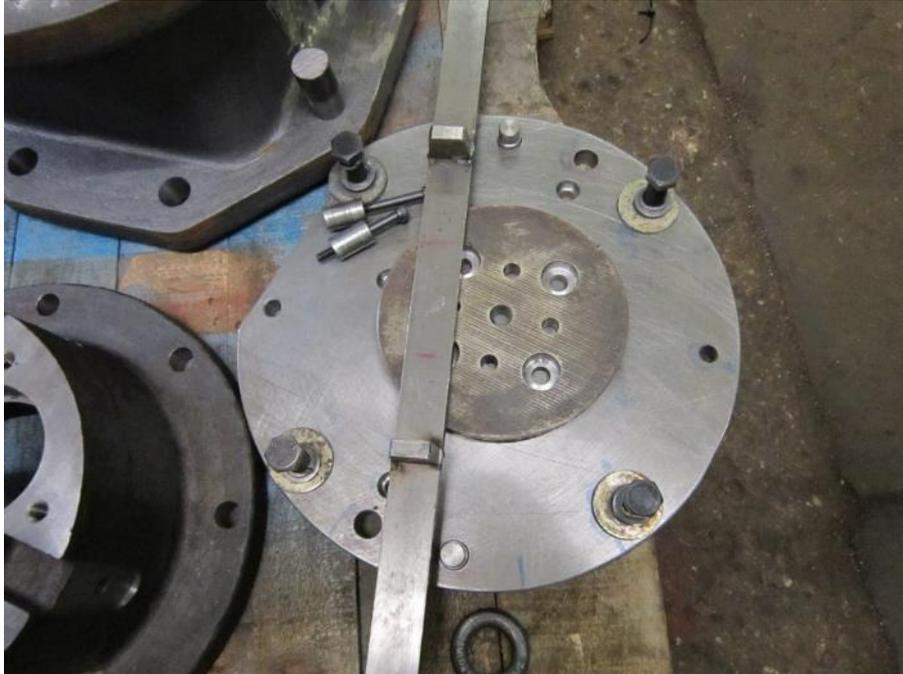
Jig to allow precise milling of the nozzle mounting holes at 8 degrees
